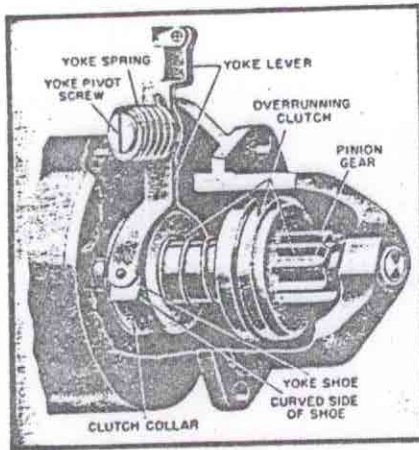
Assembly of overrunning clutch and yoke shifting lever. Make sure curved sides of yoke shoes are toward gear end of clutch. Reversed yoke shoes can cause improper meshing of pinion
